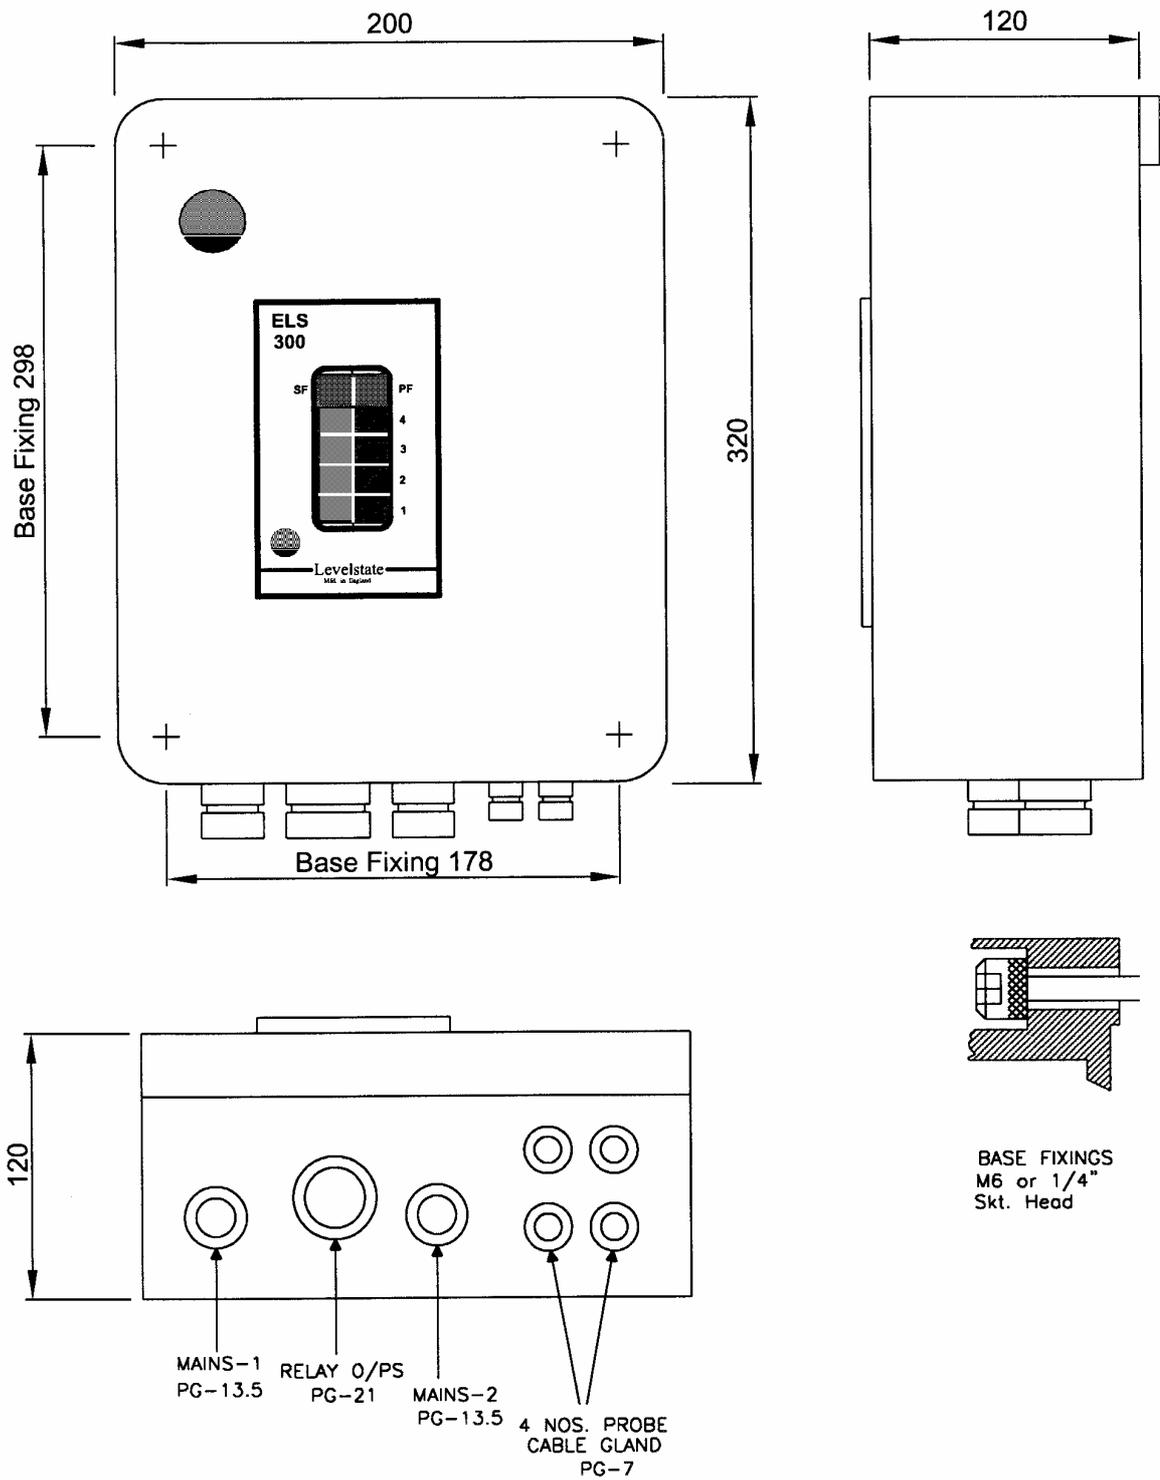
Electronic Unit Dimensions And Cable Gland Location
